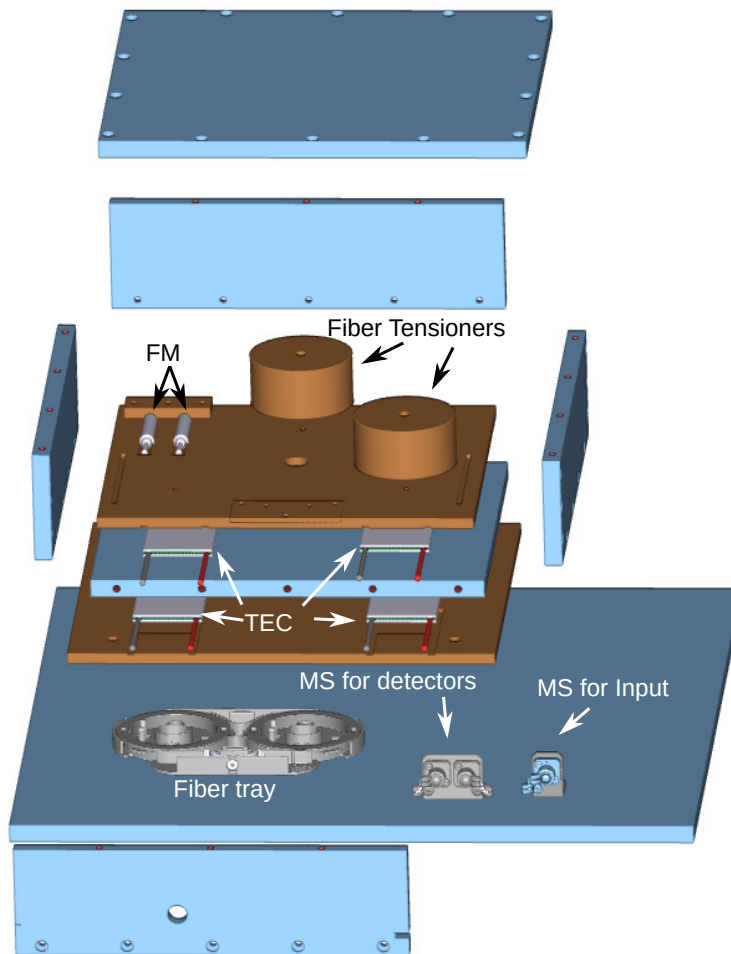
Exploded-view CAD drawing of the temperature stabilized box with internal devices. Glass fiber and electrical cables are not shown. FM - Faraday mirror, TEC - thermoelectric cooler, MS - mating sleeve for optical fiber connectors.
